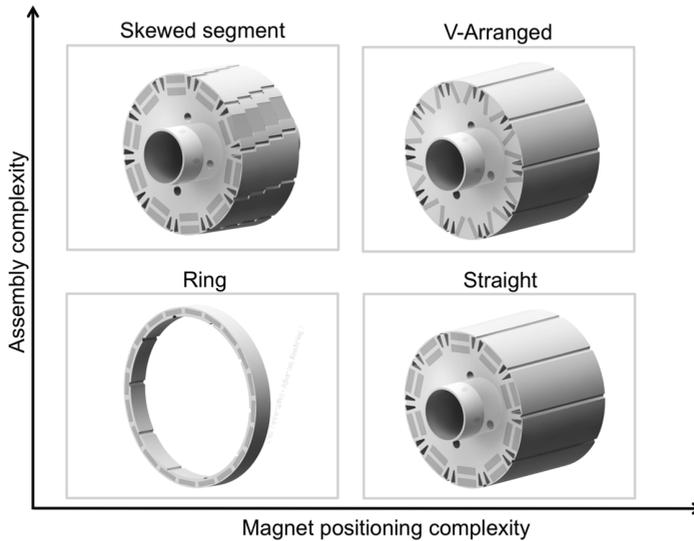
IPM-rotor technology spreads up into four magnet-positioning designs
